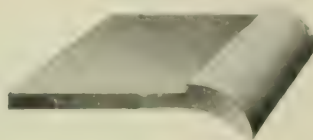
CORNER PIECE OF TERMINAL FRAME.
